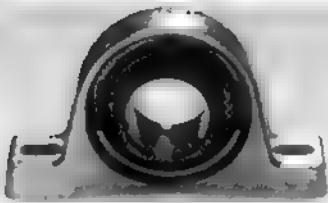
A typical plummer block that can readily be purchased. Photo courtesy SKF.
